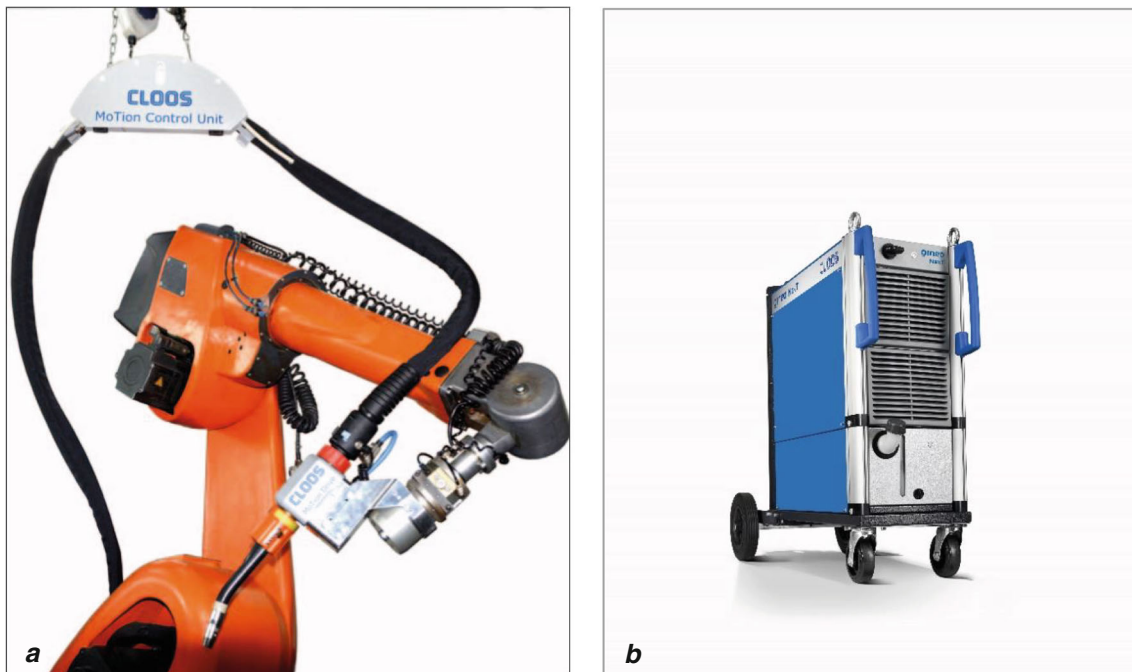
Main components of the welding system with bidirectional wire movement: “MoTion Control Unit” and “Motion Drive” (a) welding power source “Qineo NexT” (b)
